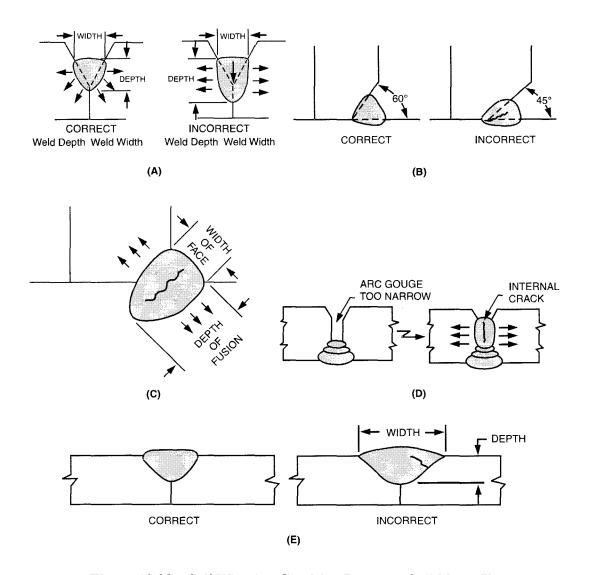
Solidification Cracking Because of Weld Profile
